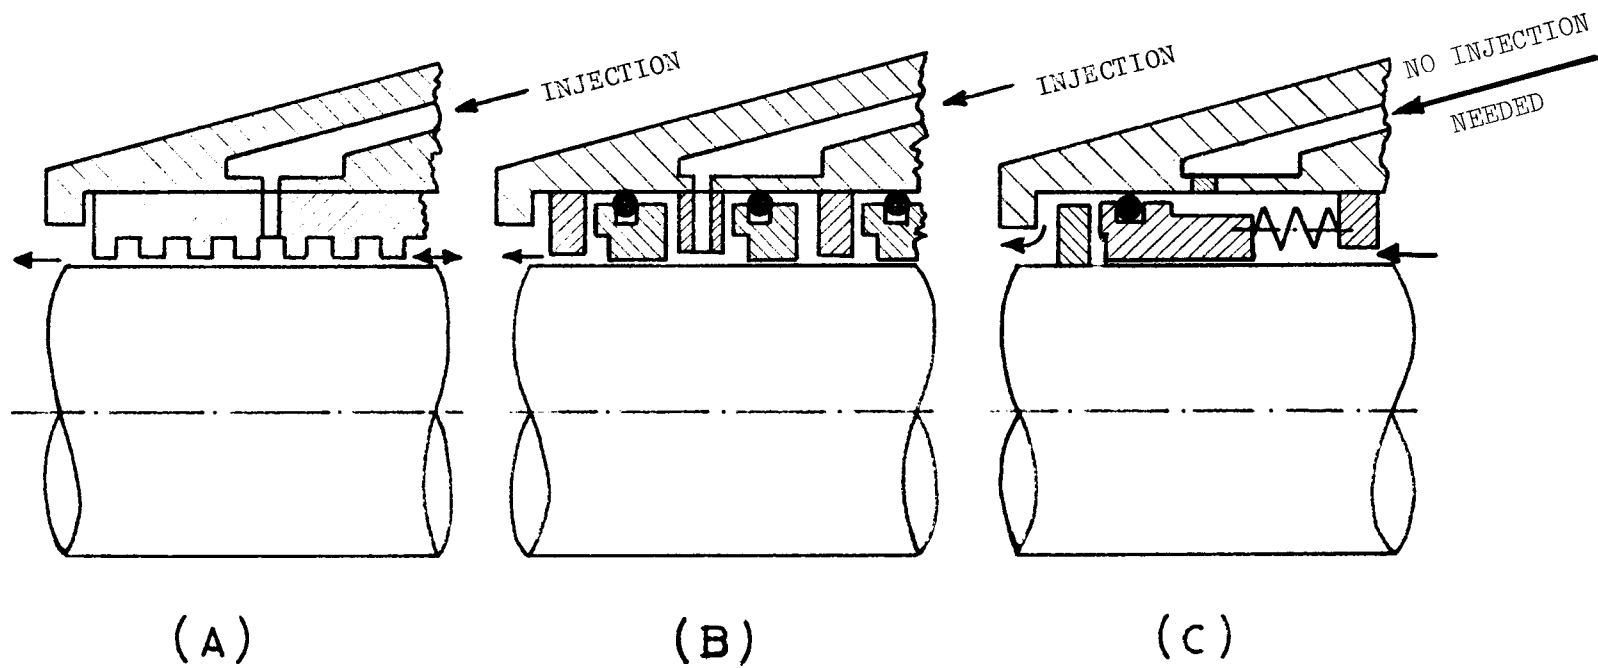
SHAFT SEAL TYPES USED IN BOILER FEED, NUCLEAR FEED, AND FEED WATER BOOSTER PUMPS: (A) LABYRINTH, (B) FLOATING RING SEALS WITH SINGLE INJECTION, AND (C) MECHANICAL SEAL.
